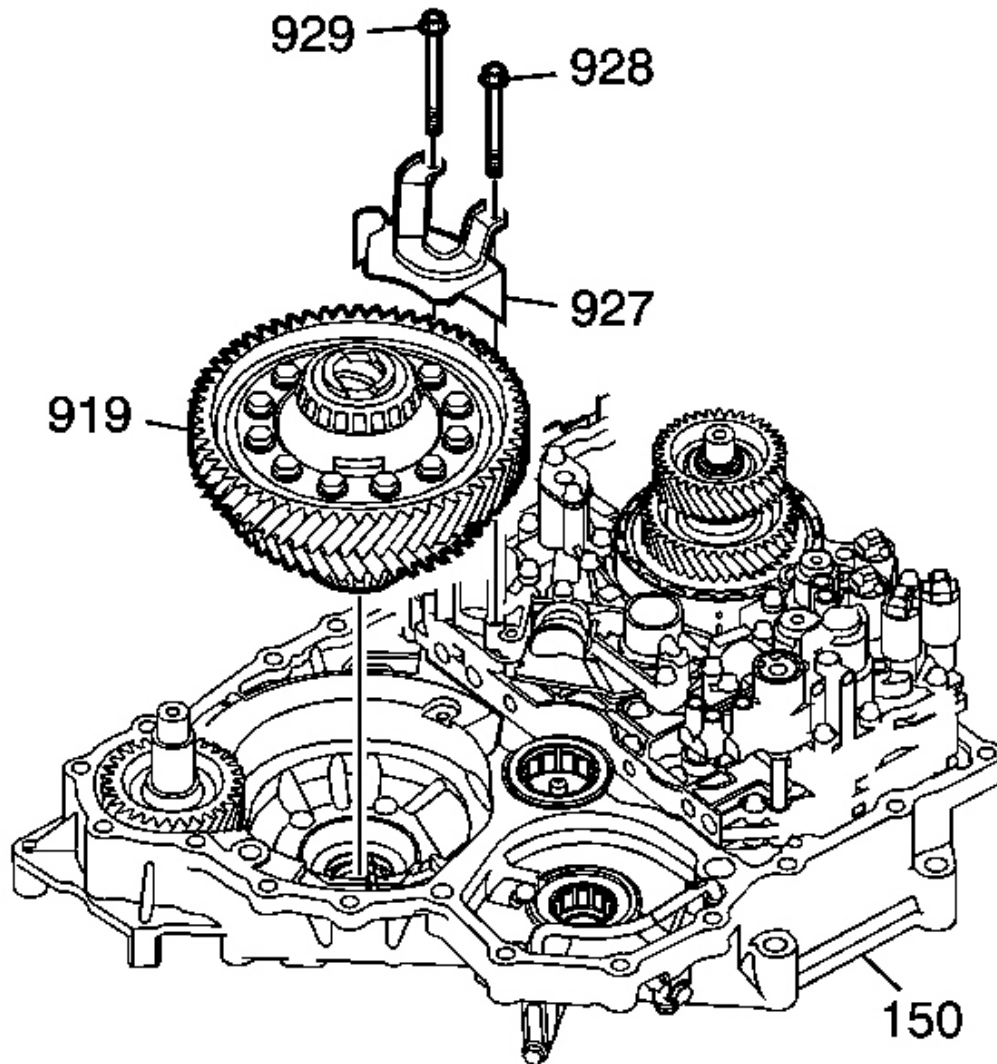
Front Differential Assembly, Automatic Transmission Fluid Baffle & Bolts
